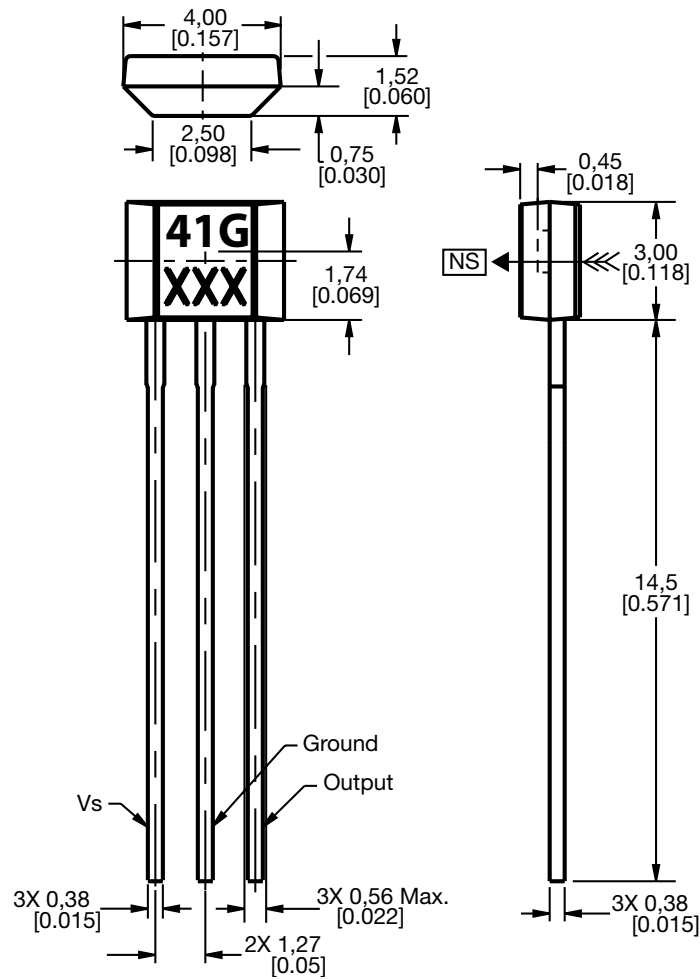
Sensor IC Mounting Dimensions (For reference only. mm/in.)
